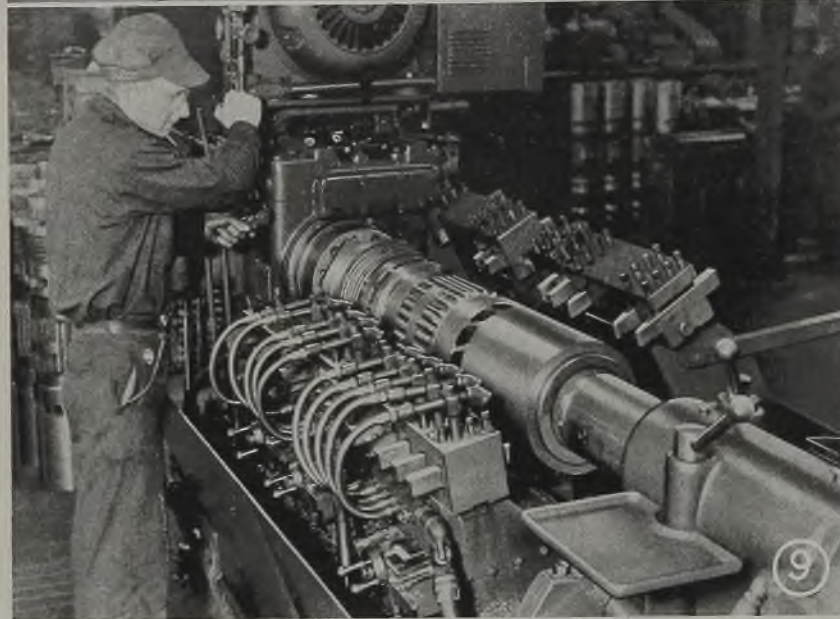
Multiple tool setup for machining cylinder liner on lathe
